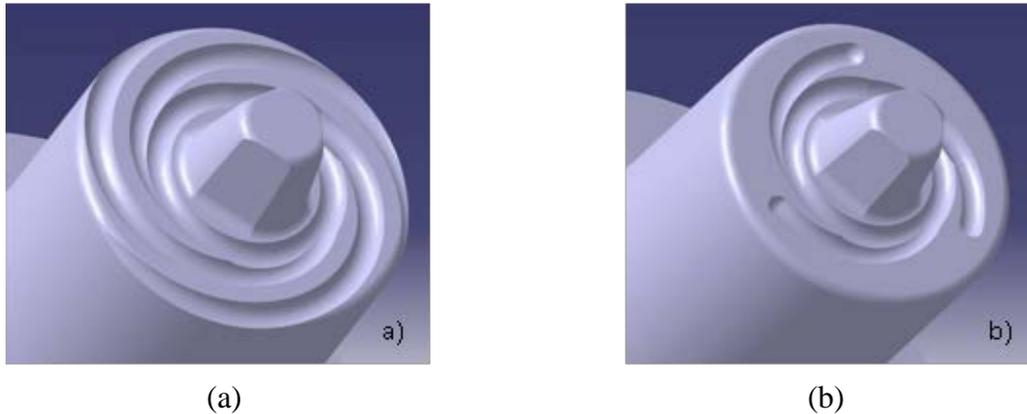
Typical FSW tool scrolled shoulder configuration with a) the scrolls extending out to the edge of the shoulder face and b) with wiper features [42] added [41]
